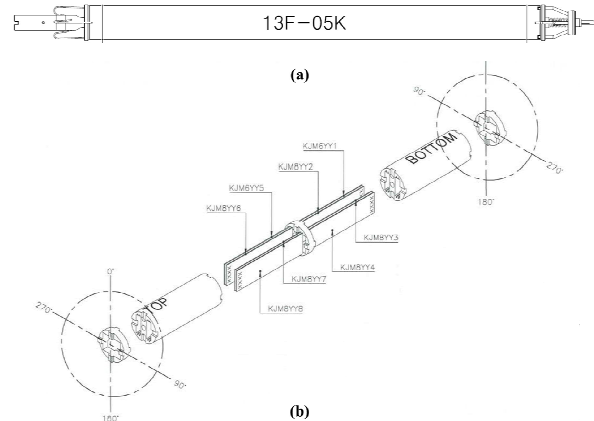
The schematic (a) outer and (b) inner part diagrams of the irradiation test capsule (13F-05K) for the mini plate fuel
